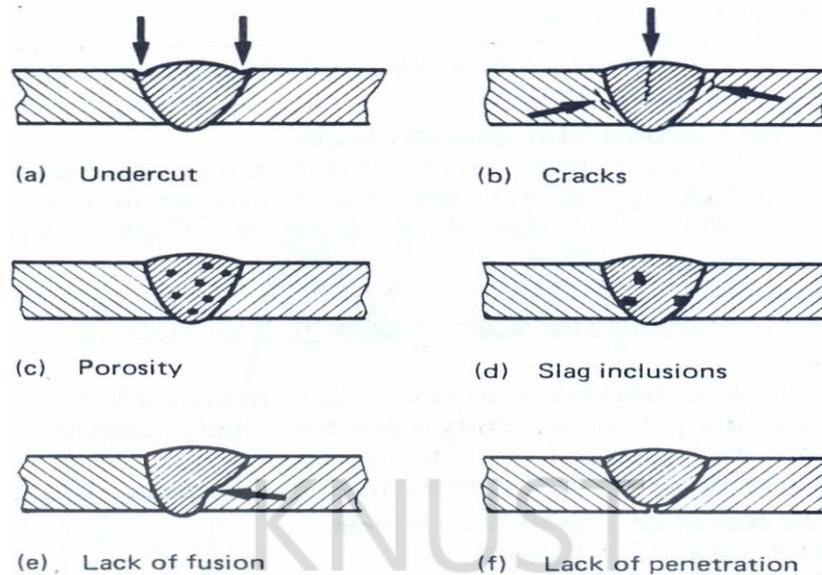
Cross-sections of welds containing typical defects (Gourd L. M. 1995).
